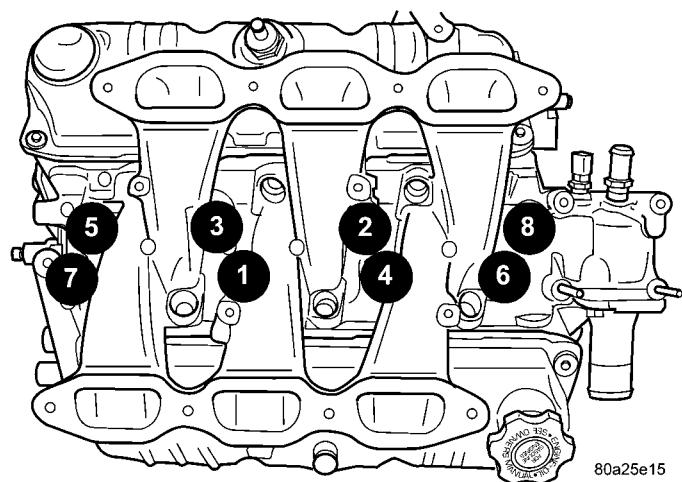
LOWER MANIFOLD TIGHTENING SEQUENCE
